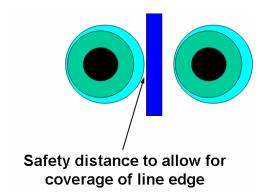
0.4 Pitch BGA Solder Mask Clearance
